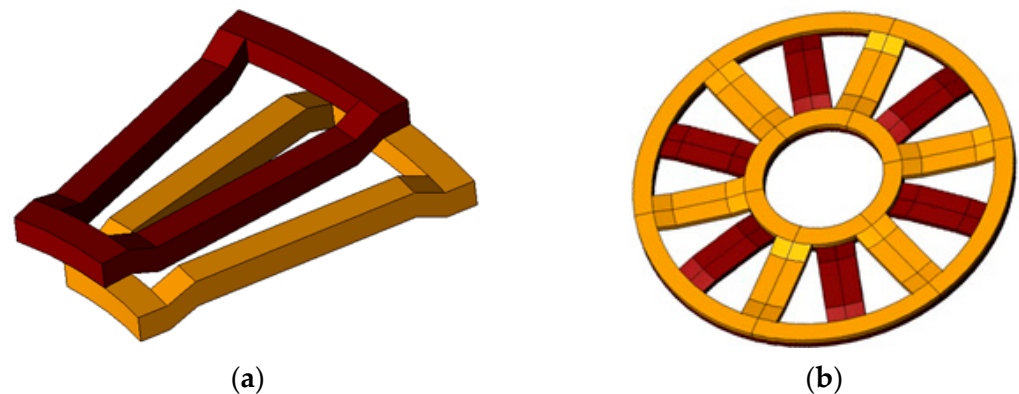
(a) Part where the coil is wound; (b) shape of assembling block coil.
